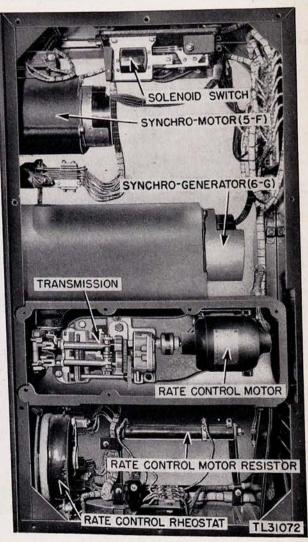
Control Unit BC-1011-A, side panel and access plate removed.
